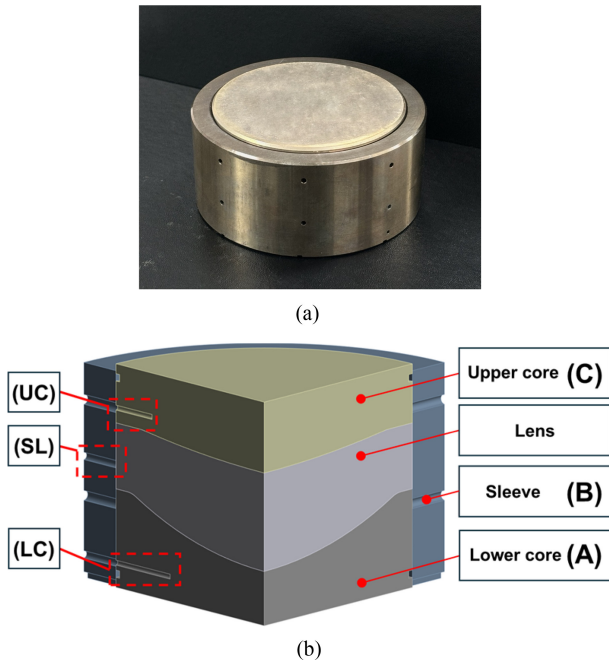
Photograph and sectional view of the molds: (a) Photograph of molds and (b) Sectional view of molds
